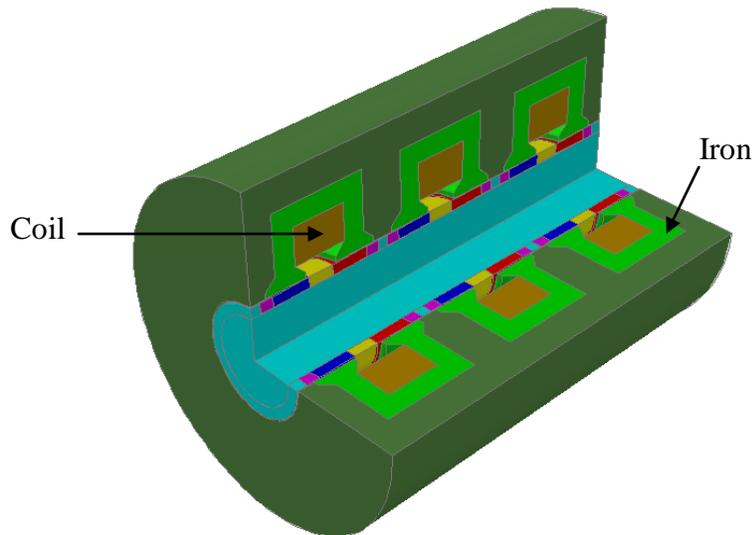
3D view of air-cored quasi-hallbach magnetised machine with rectangular magnet
